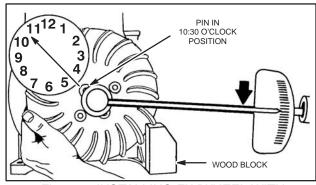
INSTALLING FLYWHEEL WITH STARTER PIN
